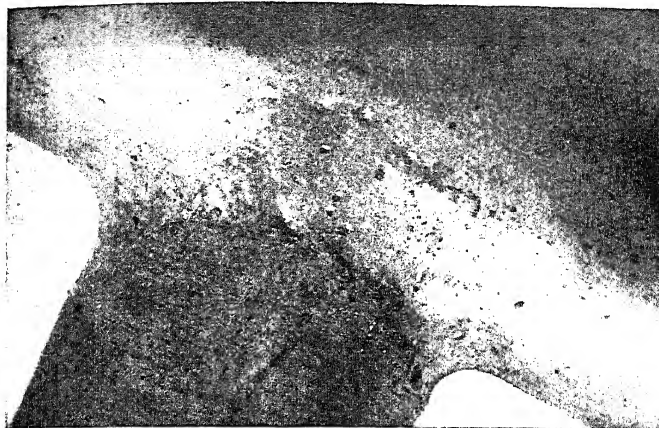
BAD JOINT: TOO MUCH ACETYLENE USED
